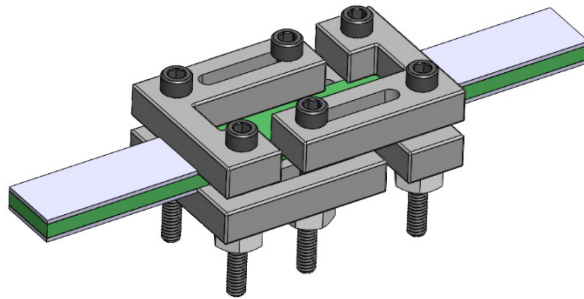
Two-piece windowed anti-buckling fixture for rectangular fatigue specimens.
